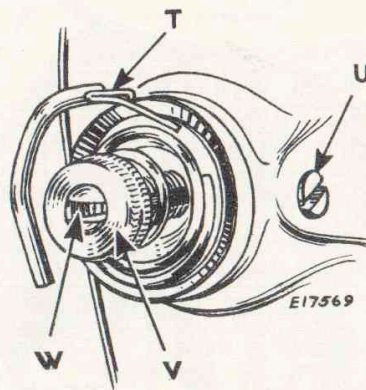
Timing and Adjustments of Thread Take-up Spring
